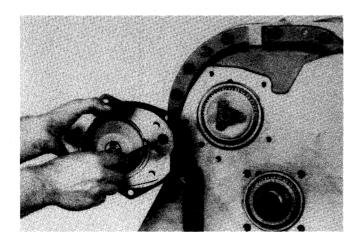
Install new "O" ring and gasket on low (1st) clutch shaft rear bearing cap.
